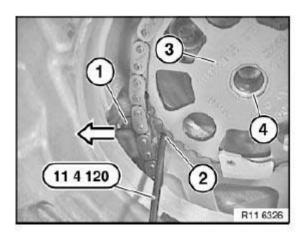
Pressing Timing Chain Using Chain Tensioner
